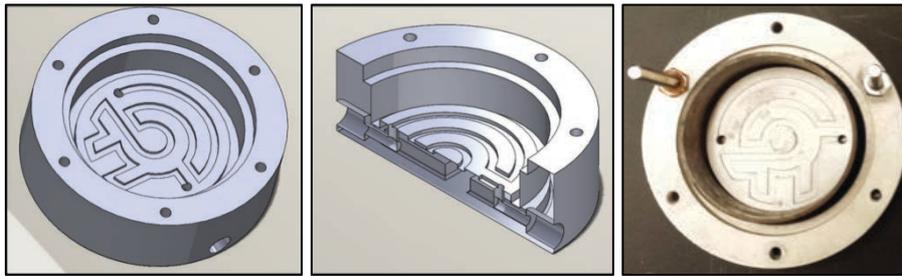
Base detail: a) 3D view of base design. b) Cross section showing grooves, inlet, and outlet connections. c) Picture of the base.
